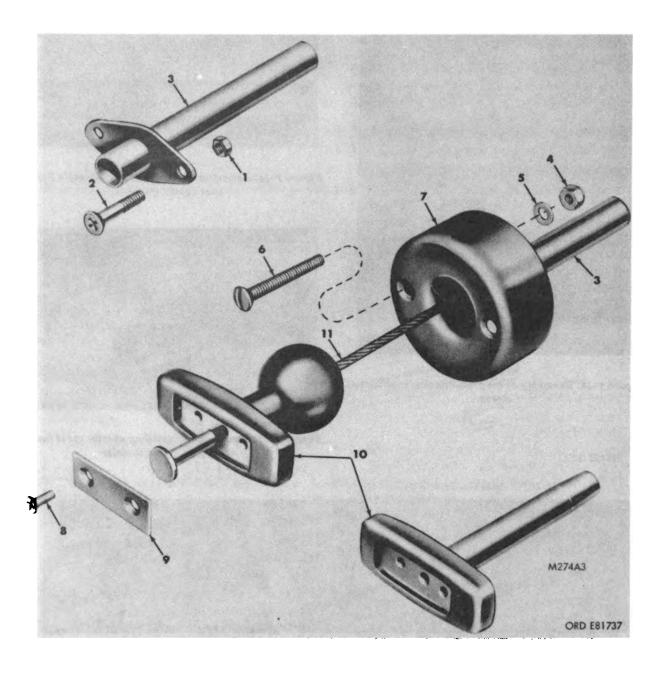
Removing or installing starter cable handle and guide (later models).
